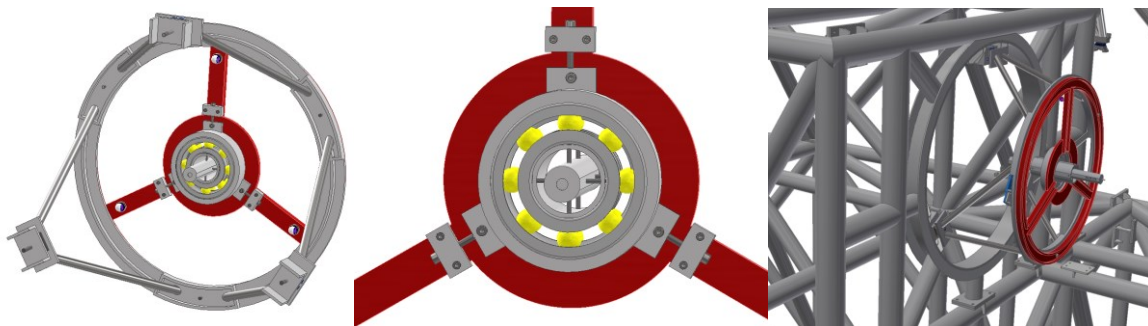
the IFP flange in its alignment configuration, with the laser installed.
